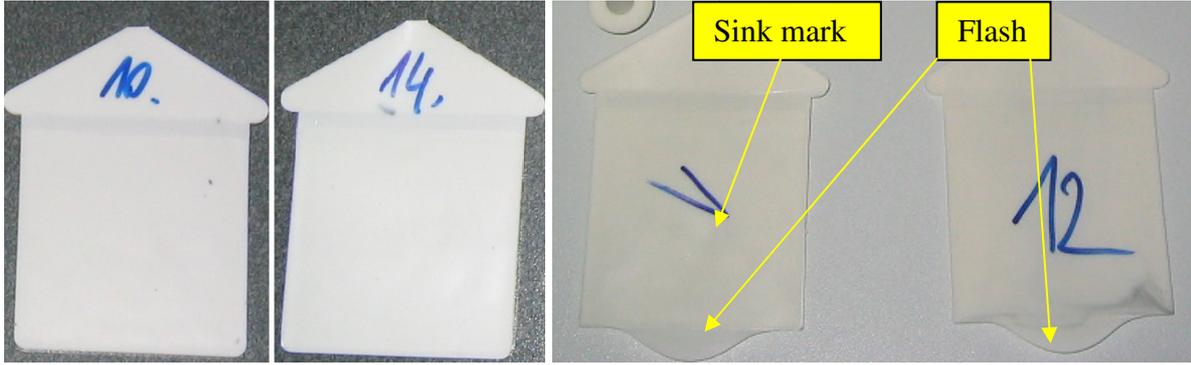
Specimens produced with unused (10 and 14) and corroded (1 and 12) injection mold engraving insert.
